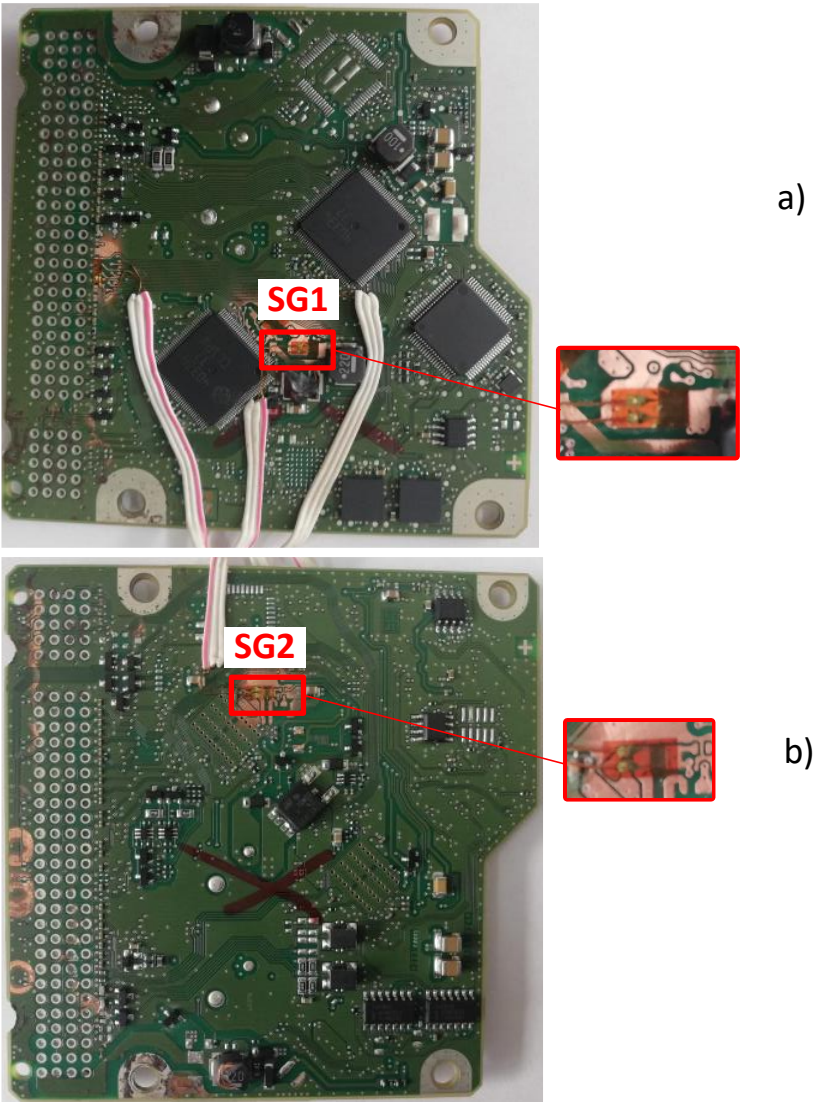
PCB with Strain Gauges: a) Upper side (or fiber);
